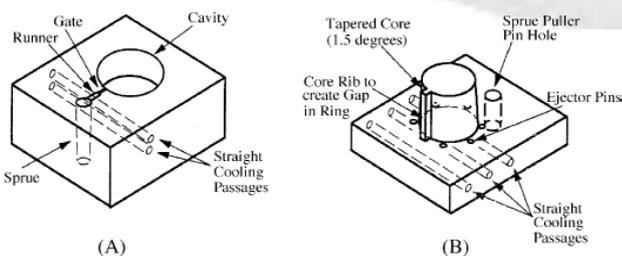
Cavity (A) and core (B) of a drilled channels mould
